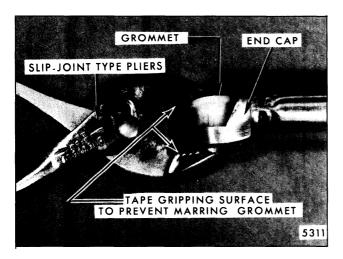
Counterbalance Support Assembly Grommet Replacement
